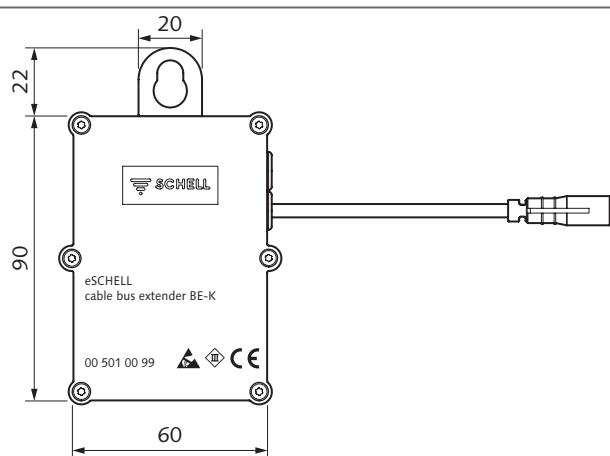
eSCHELL cable bus extender BE-K — dimensions
